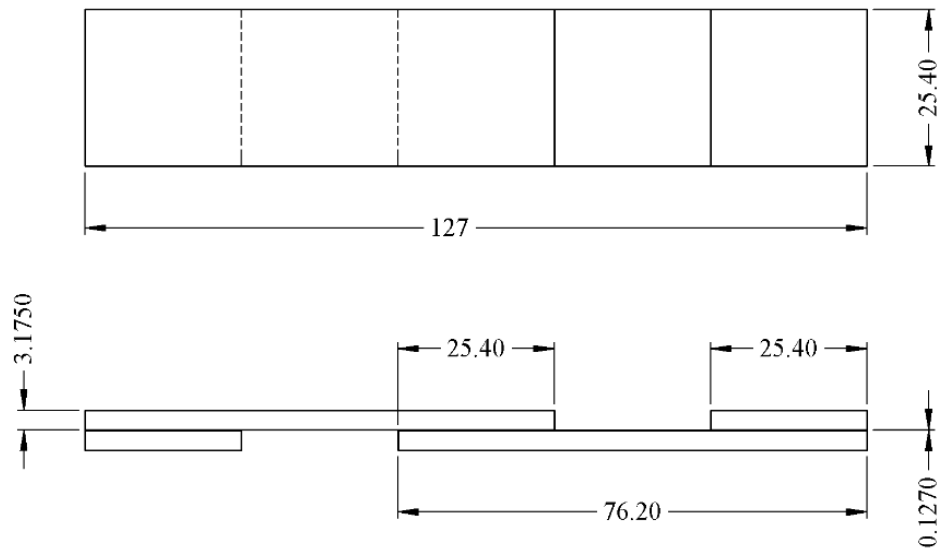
Geometry and dimensions of impact SLJ specimens (all dimensions in mm)
